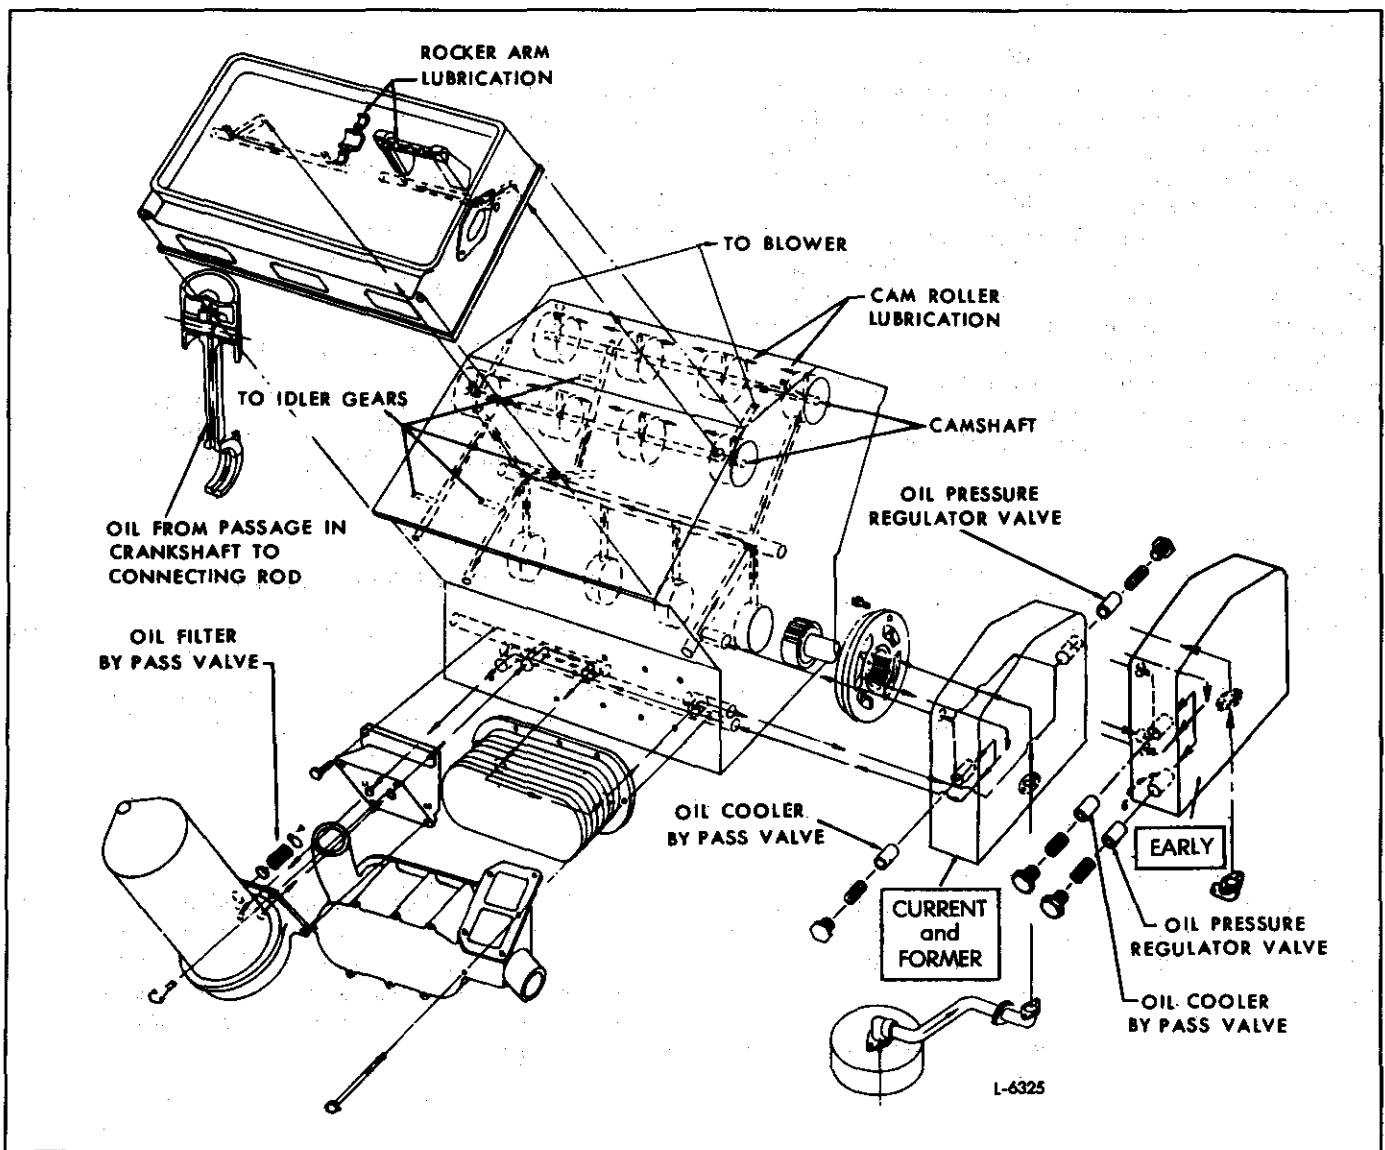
Schematic Diagram for 6V-53 Engine Lubrication System
